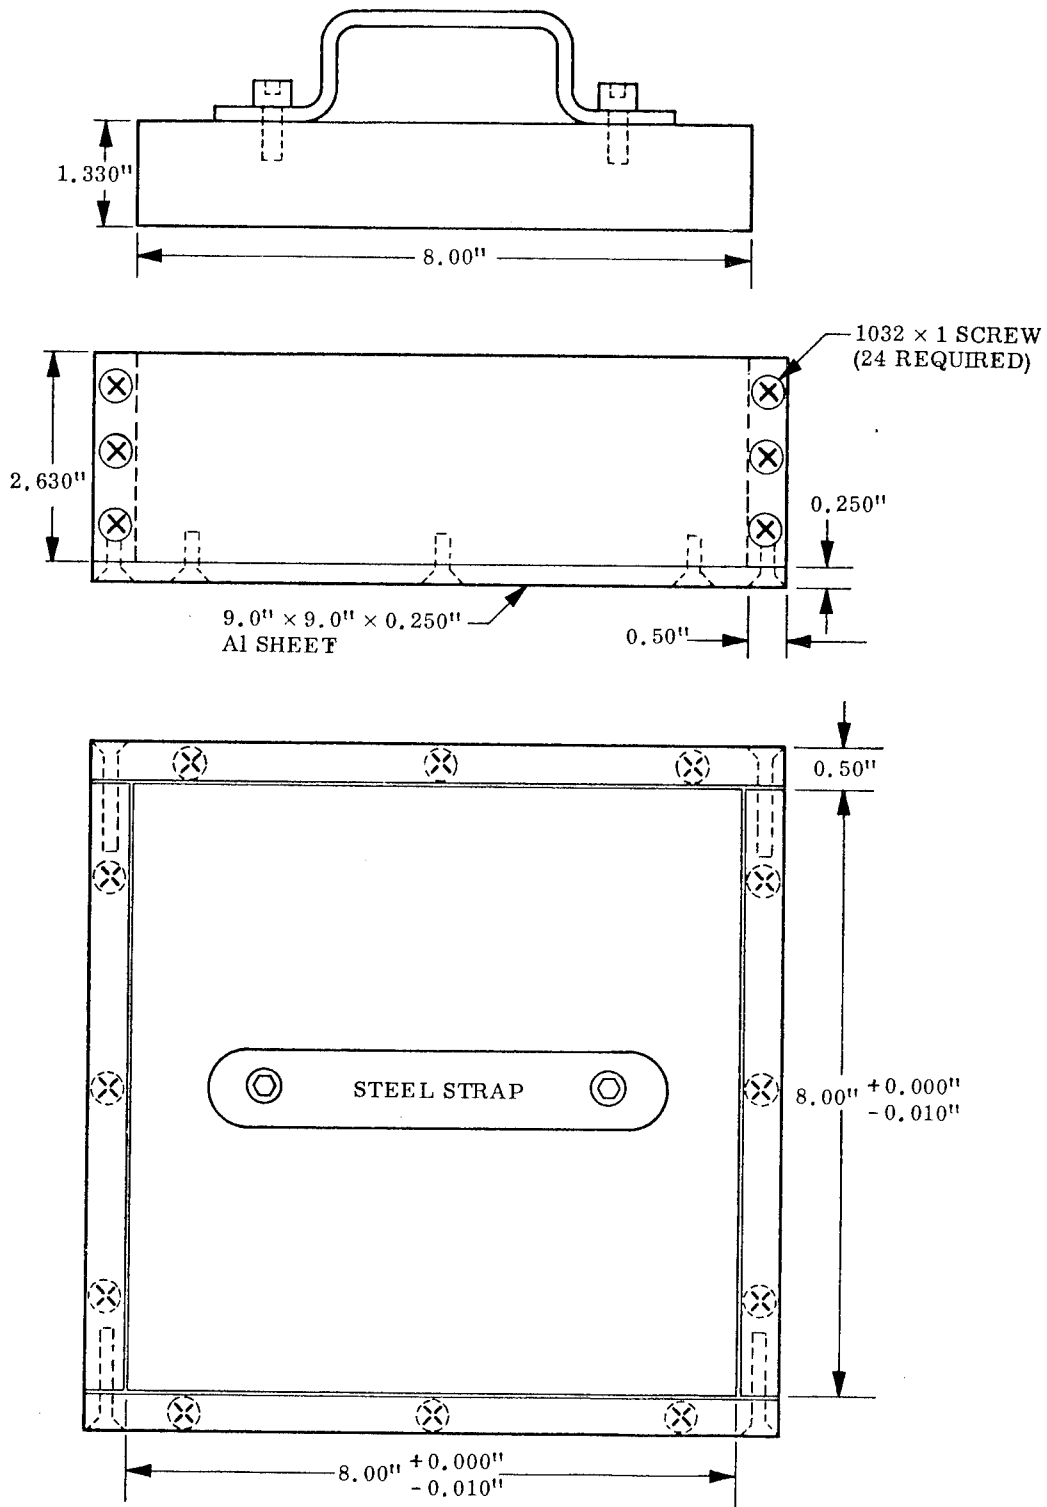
1-inch PBI-Carbon Composite Billet Preform Mold (Aluminum)
